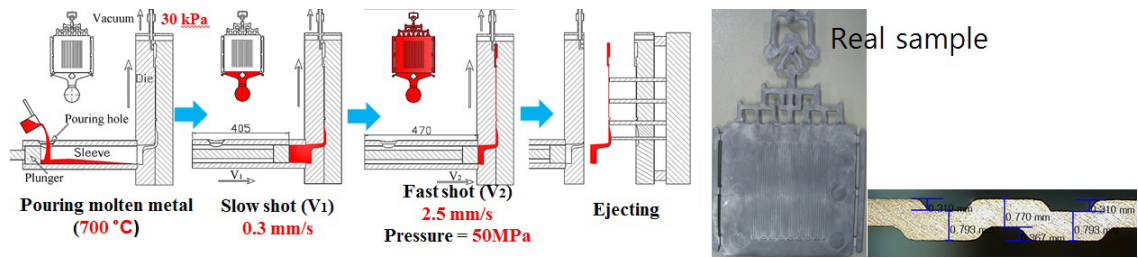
Thin plate fabrication by vacuum die casting (Jin and Kang, 2012).
